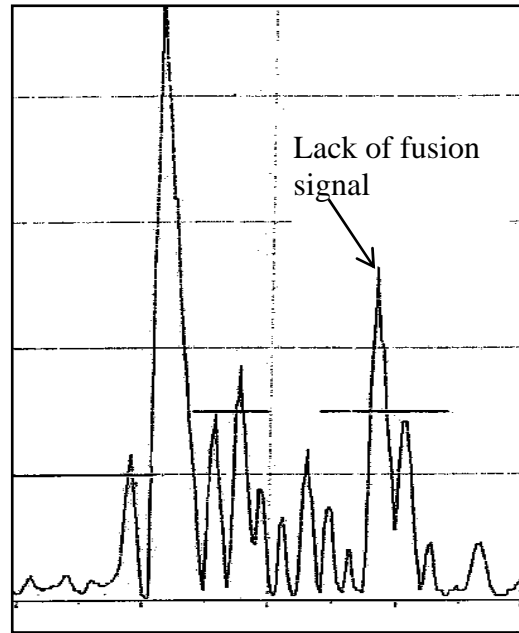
Ultrasonic signal from a lack of fusion defect in the end-plug weld
